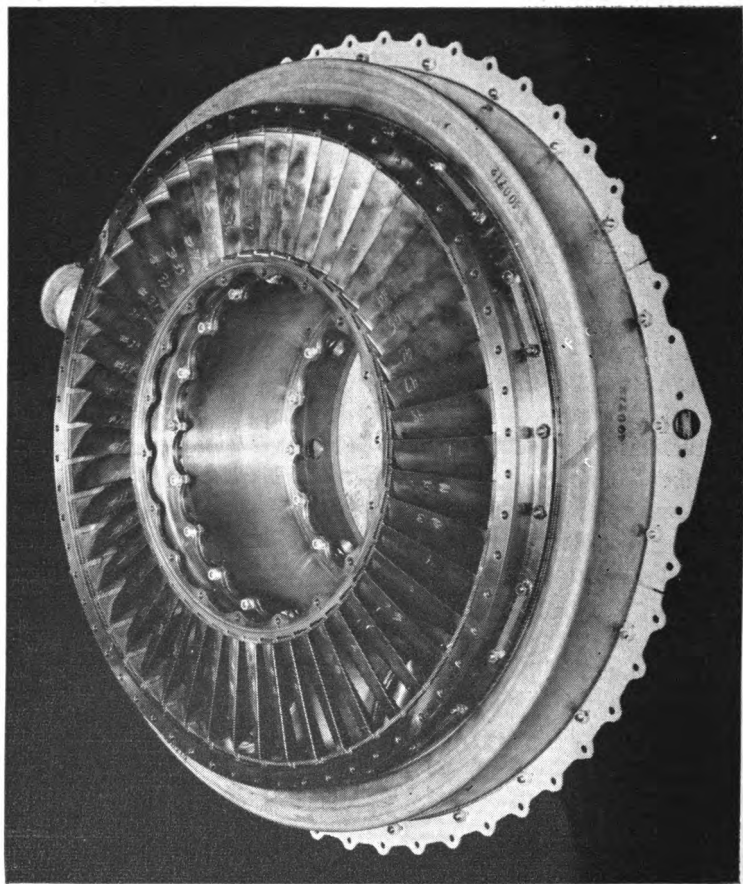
Combustion chamber support and turbine nozzle vanes.
